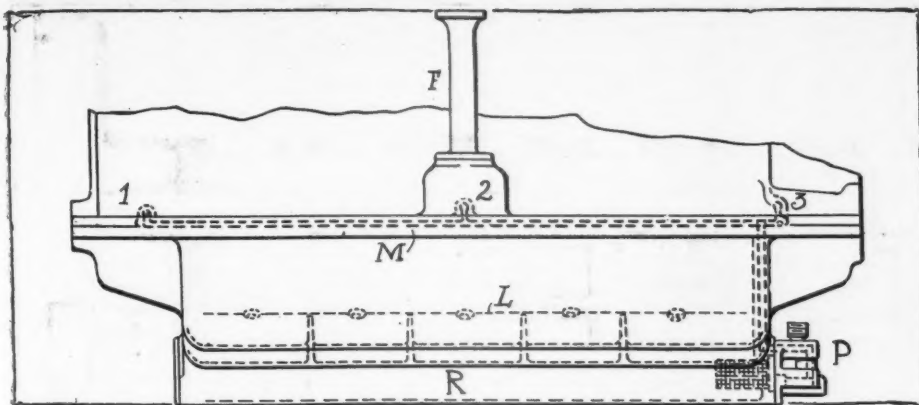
DIAGRAM OF OILING USED ON CONTINENTAL MOTORS
